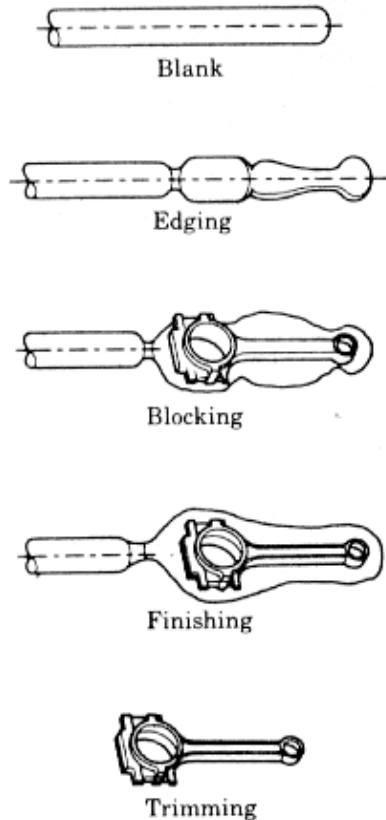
Stages in forging a connecting rod for an internal combustion engine. Note the amount of flash that is necessary to fill the die cavities properly.
